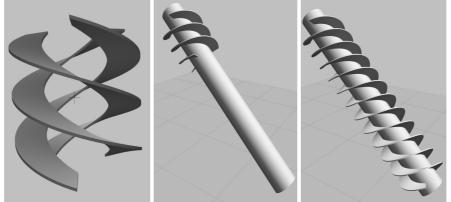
Placing screw blades on the inner screw cylinder 4a, 4b, 4c.
